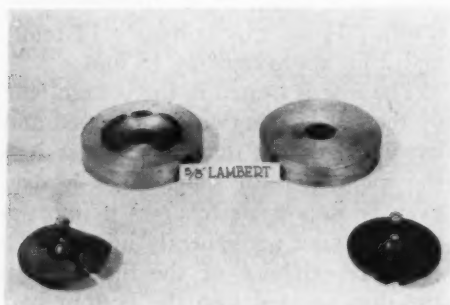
Molding Die for $\frac{5}{8}$ -in. Lambert Flat Type Disc With a Burned and a Remolded Disc
